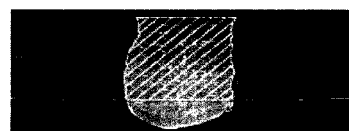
Calculation of section area of weld metal for the underfill and back bead
